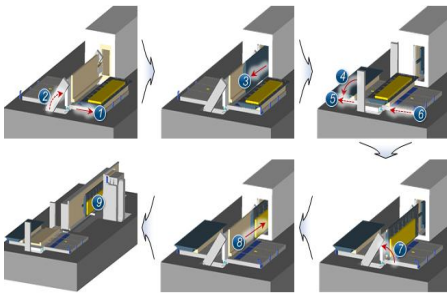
Kinematic motion of sprint Z3 NC-head and attach angle head
